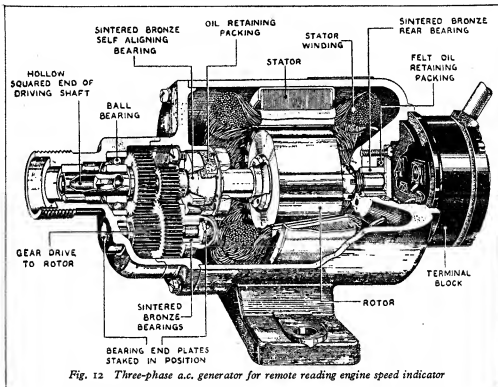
Three-phase a.c. generator for remote reading engine speed indicator
